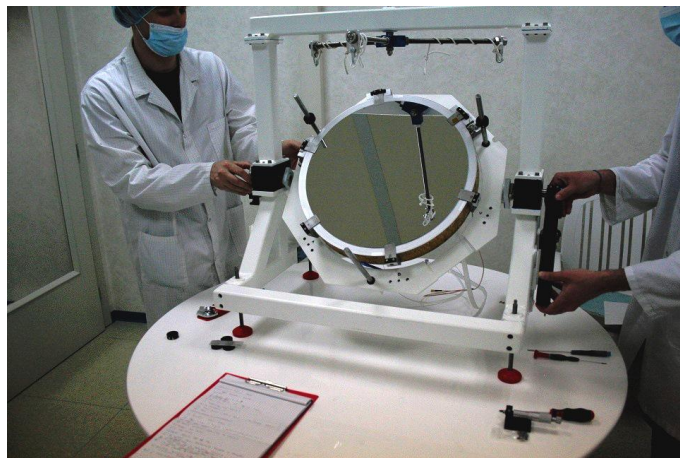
The OBB assembly on its integration stand, before the electromechanical tests.
